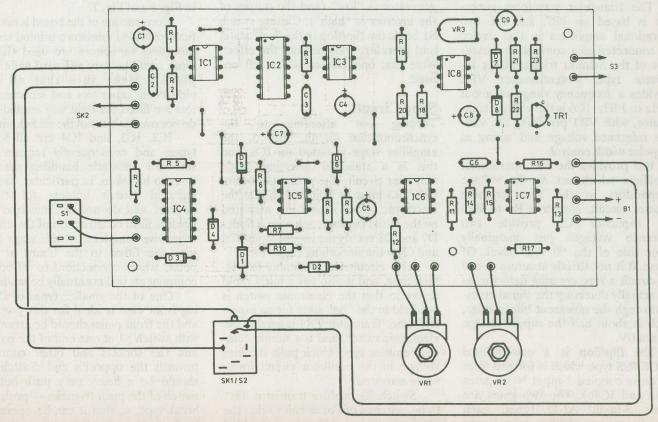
The printed circuit board component layout and interwiring details for the case-mounted components.
